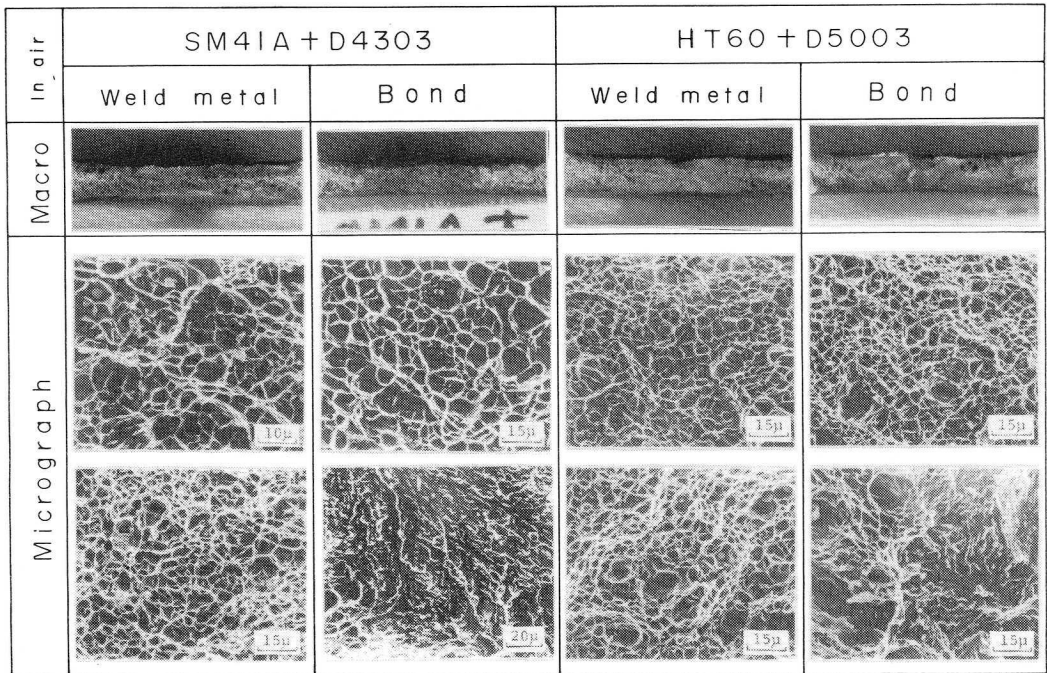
Macro and micro fractographs of tensile test (In air)
